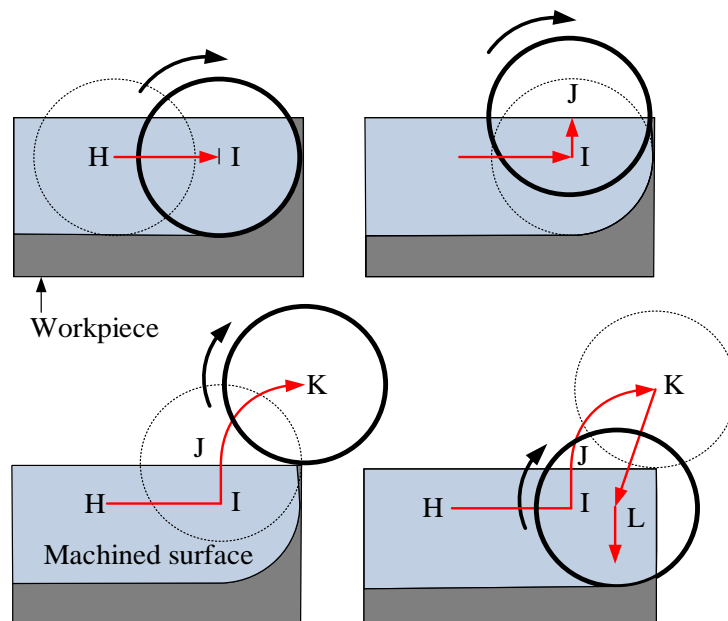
Tool path method for tool path C²⁶⁾.
